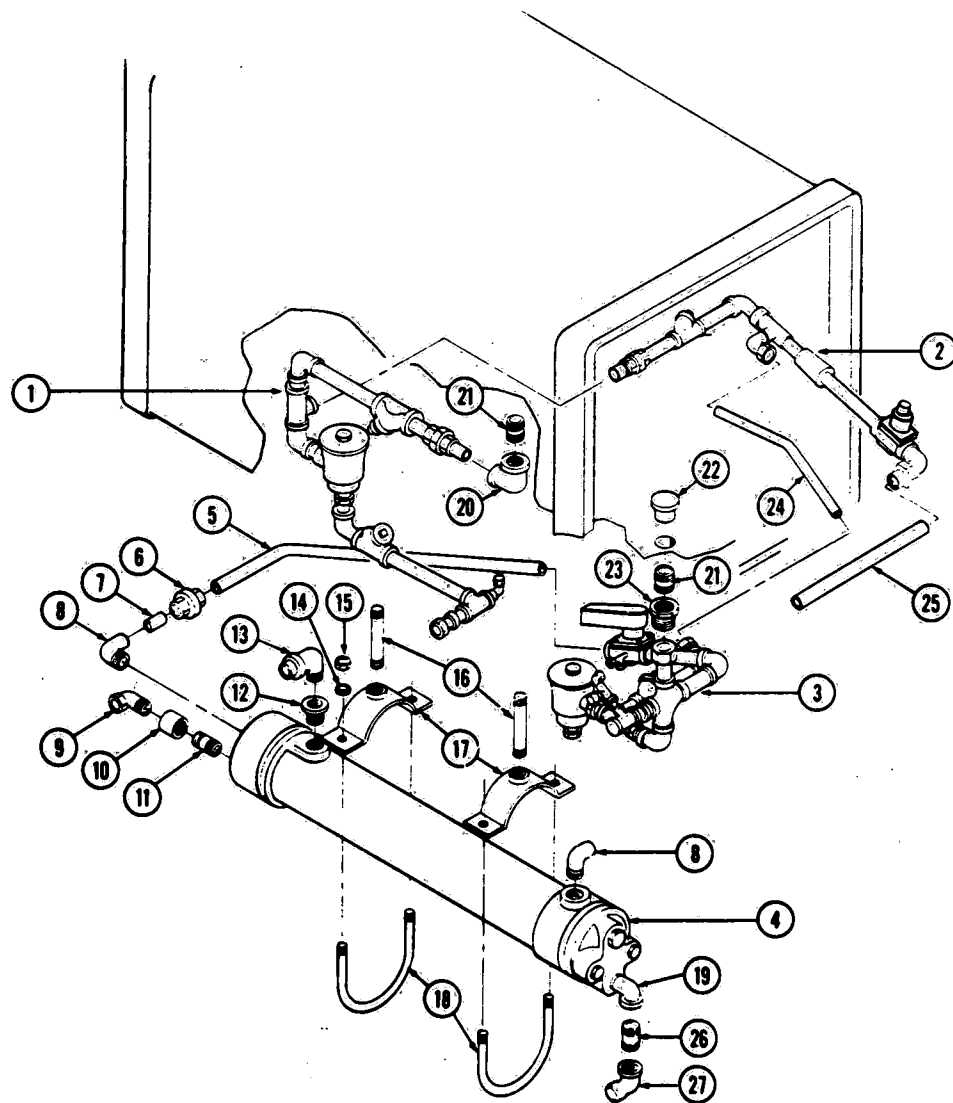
PIPING SUBASSEMBLY, Bottom - Vacuum
